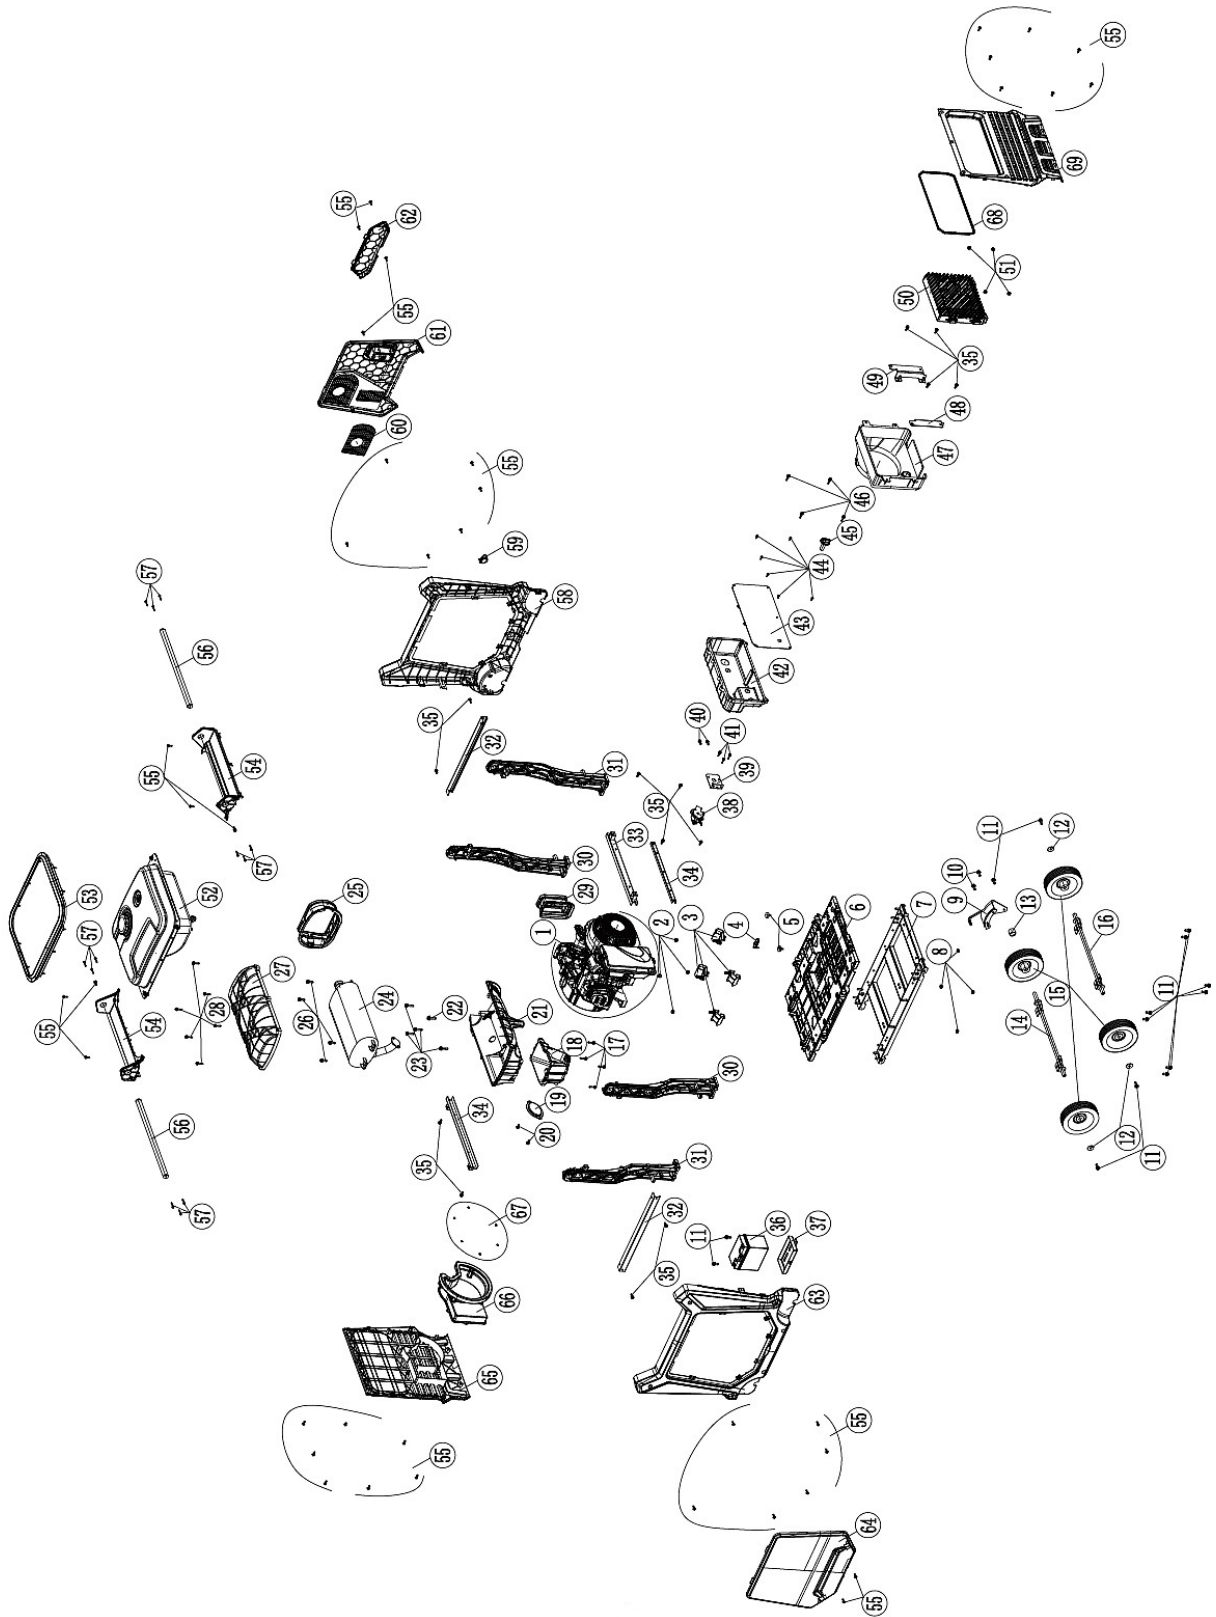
Spare parts drawing 1 PG-I 80 SE
